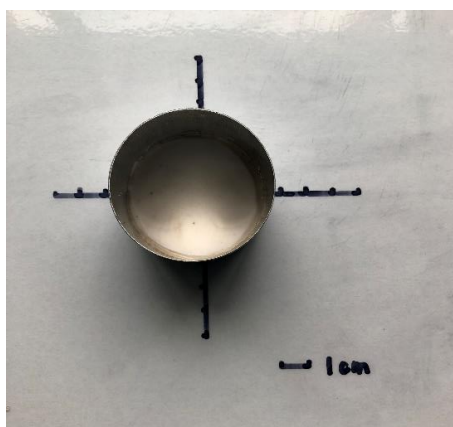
Photo of the cylindrical aluminum mould used for casting samples.
